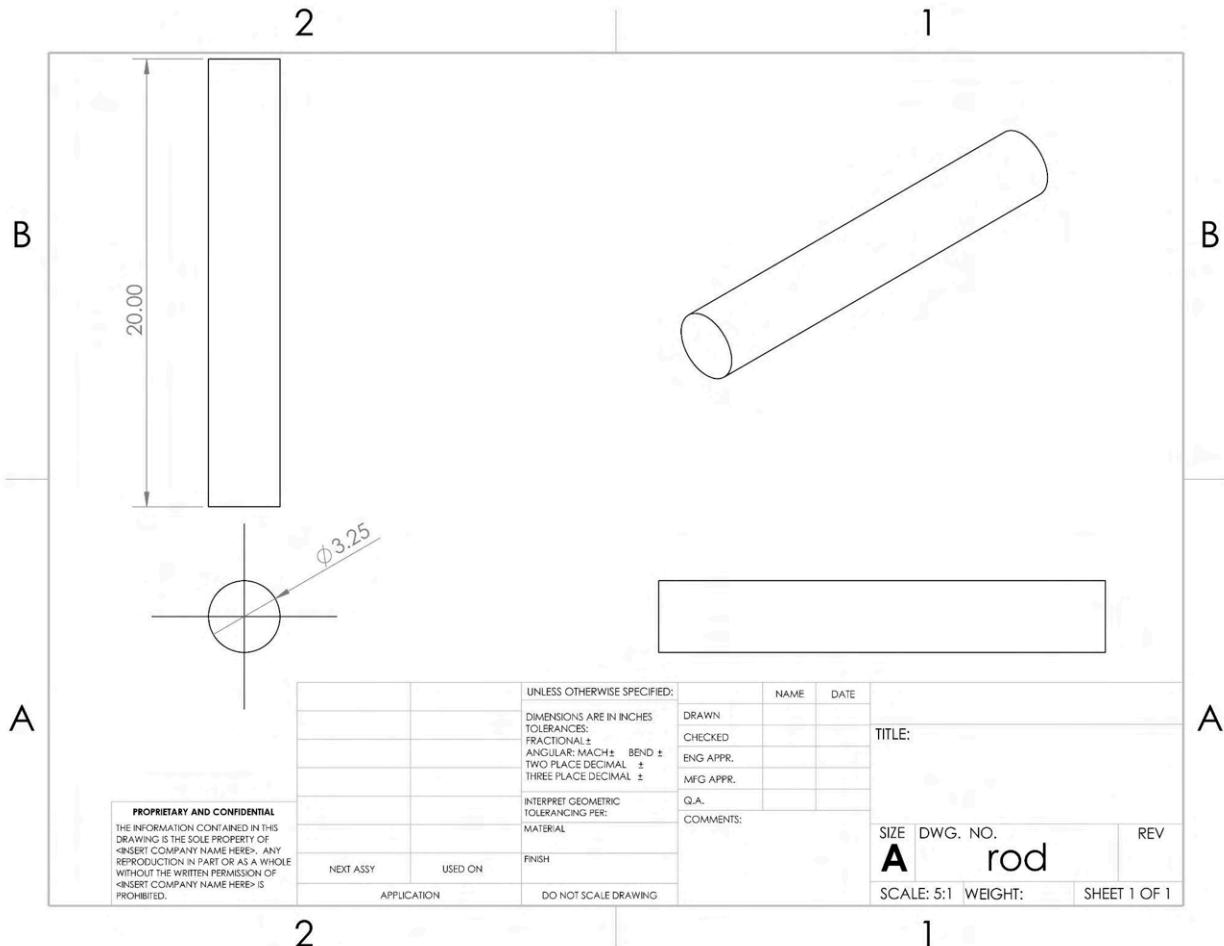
Pin. The dimensions are in mm, not inches. (updated dimensions)
